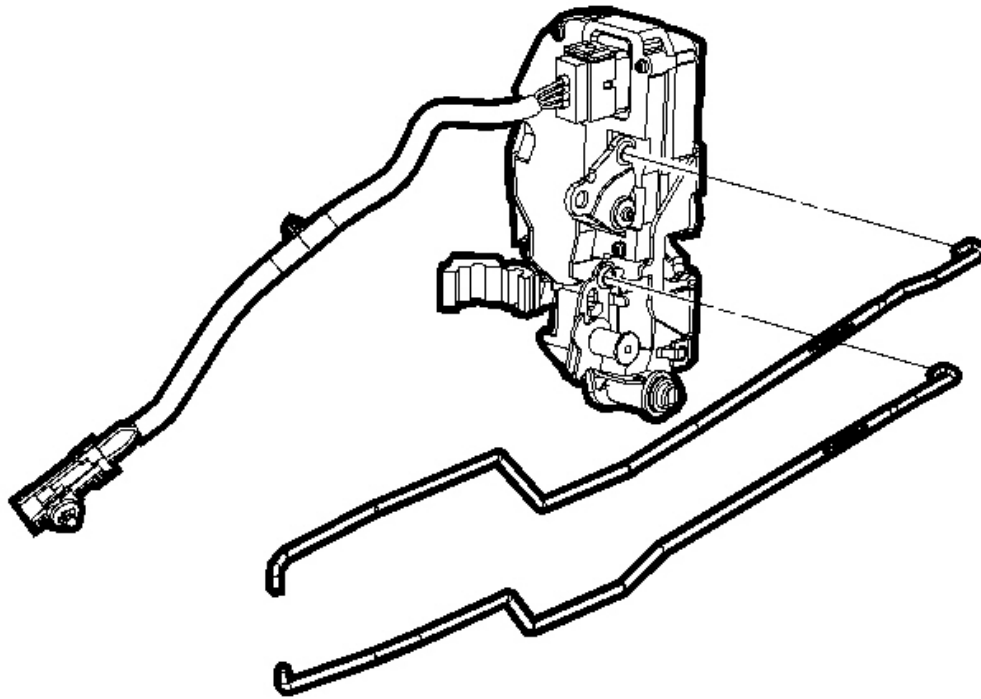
Disconnect/Connect Inside Handle Rod & Lock Rod From Latch Assembly
